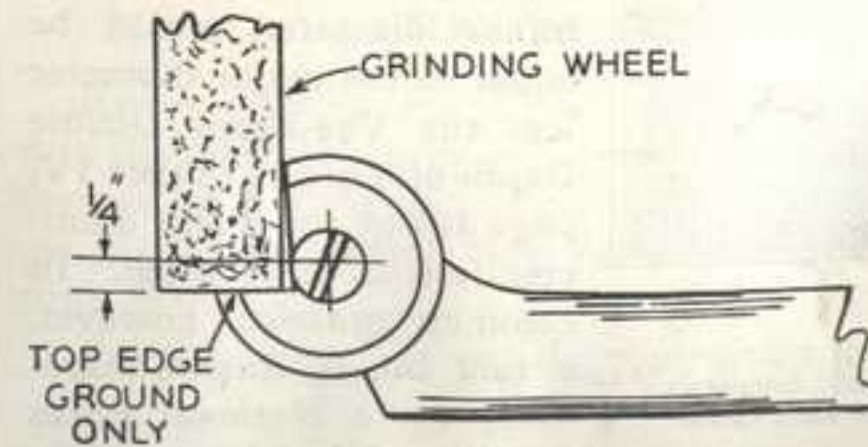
Proper method of grinding the threading tool shown in Figure 22. The side faces are never ground.
